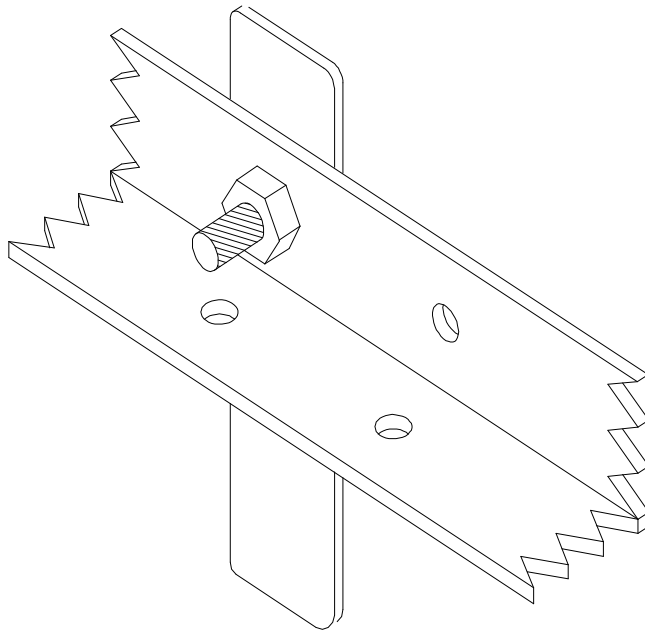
Damping component using paddle, shown attached to mechanical arm with bolt and nut.
